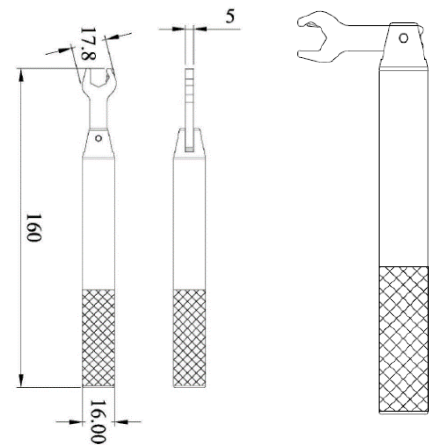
Torque Wrench Drawings (MEW-40A11)
